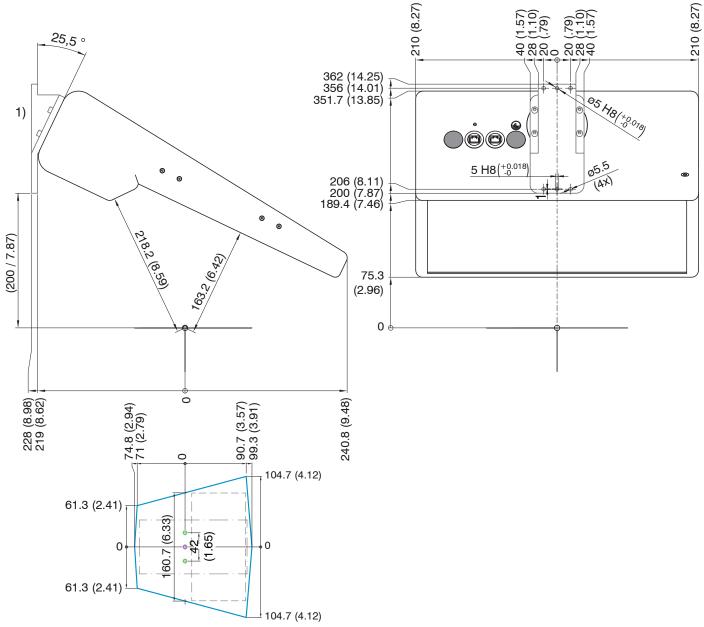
Dimensional drawing of RCS130-160 measuring system with measuring window
